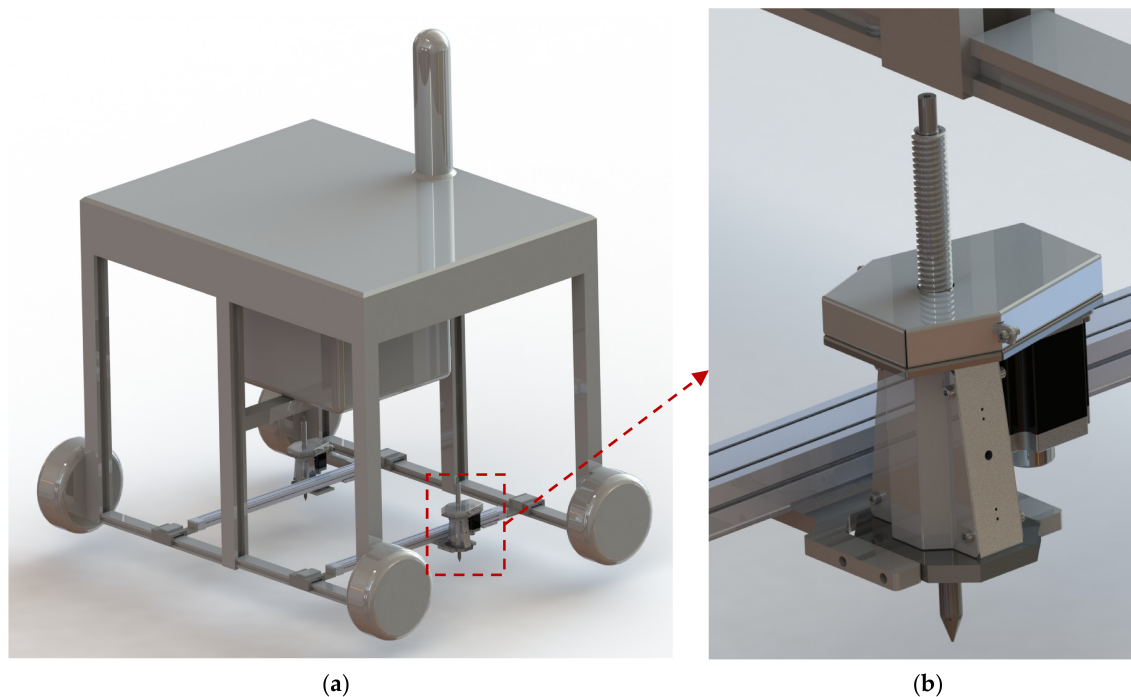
(a) Example of an autonomous mobile agricultural platform equipped with the proposed root-targeted steam injection module. (b) Close-up view of the steam injection module.
